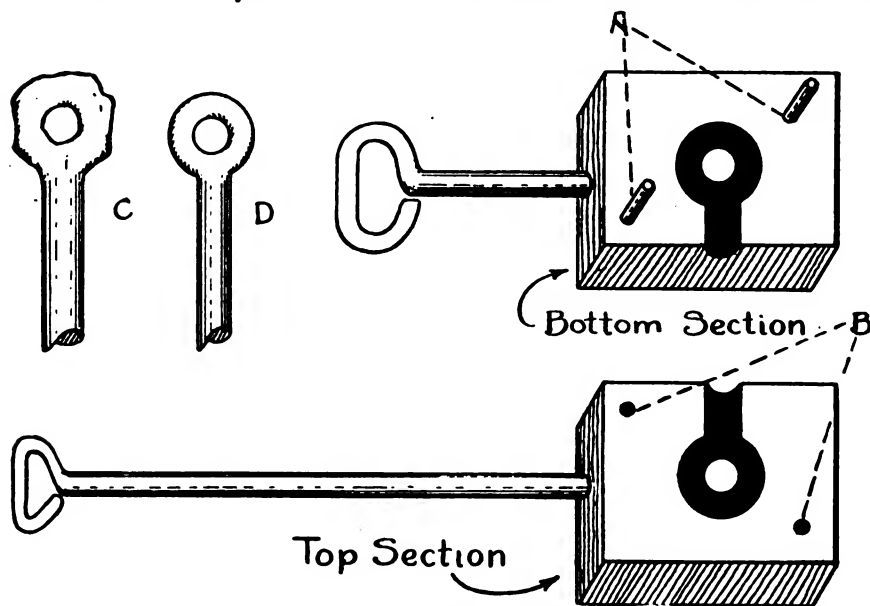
HOT STAMP FOR MAKING EYE-BOLTS
